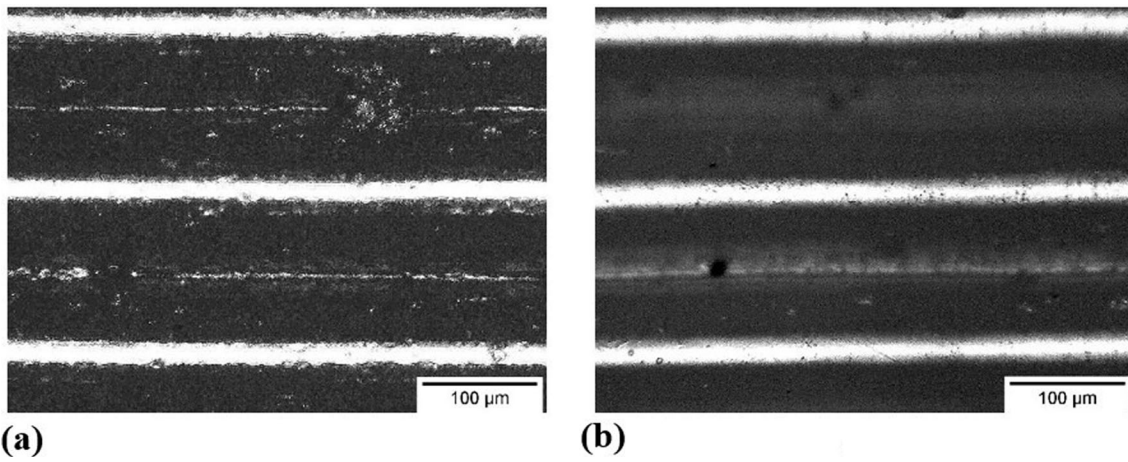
Optical images of the side surface of the specimens: (a) PLA; (b) PC
